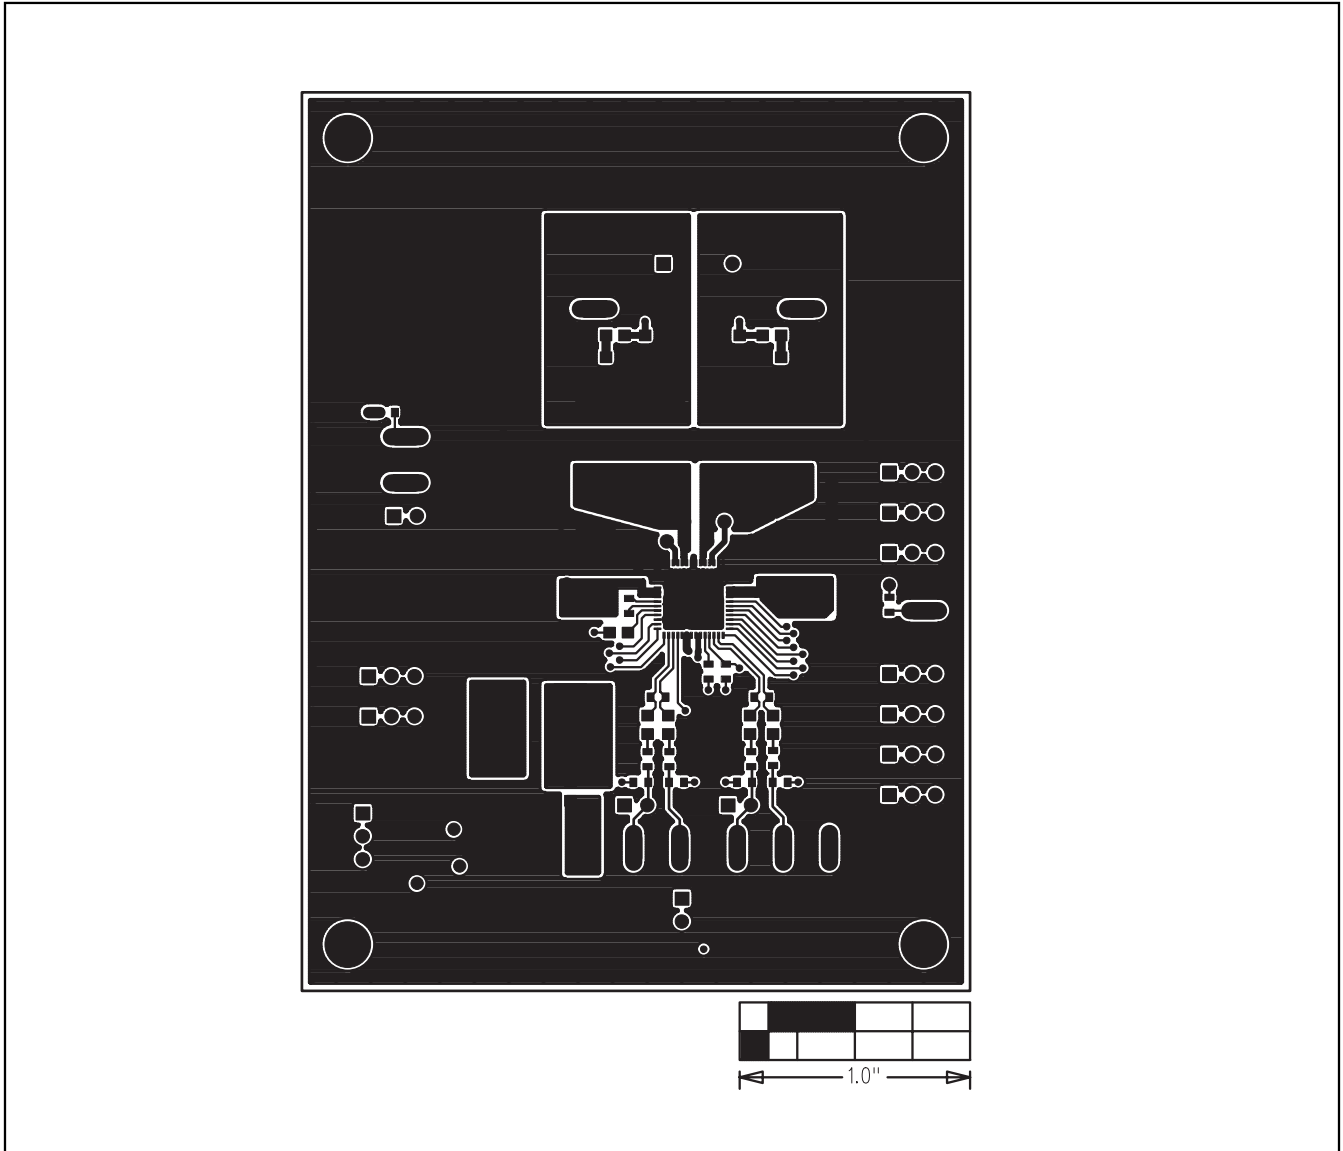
MAX9708 EV Kit PCB Layout—Component Side
